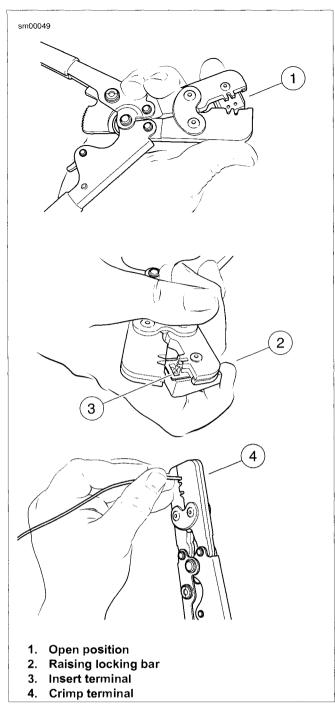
Packard Micro 64 Connector: Terminal in Crimper
